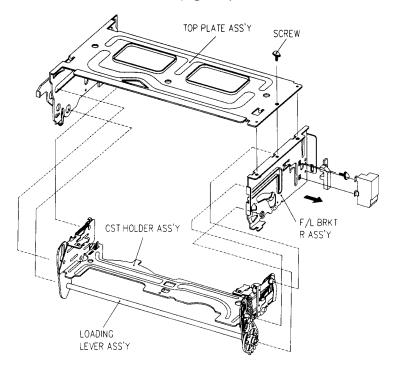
DISASSEMBLY OF THE FRONT LOADING ASS'Y
